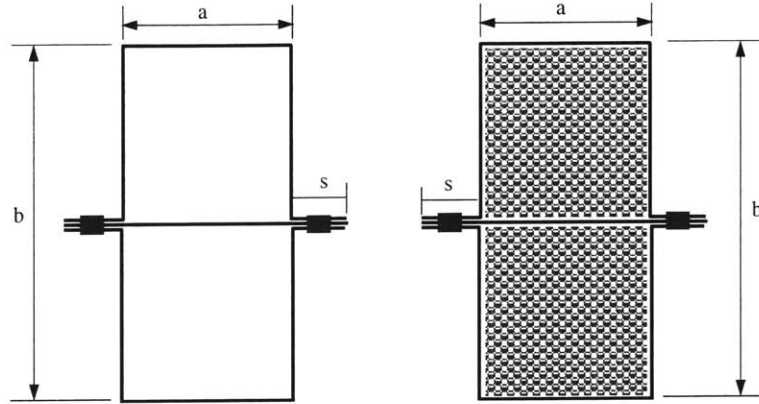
Geometry of a double-hat with center flange section (empty and foam-filled)
